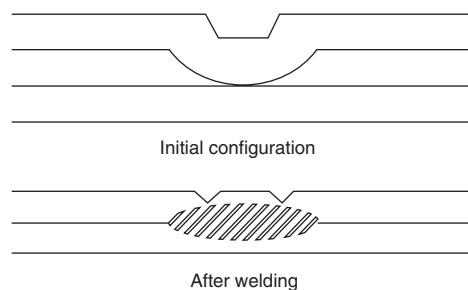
Typical stacked configuration for embossed-projection welding of sheet
